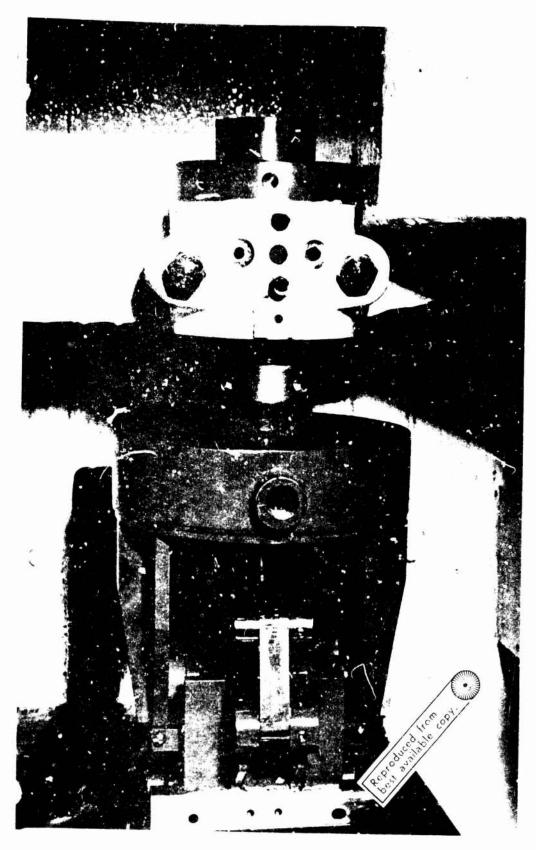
Side View Of Sealing Head In 216 VOC Machine
